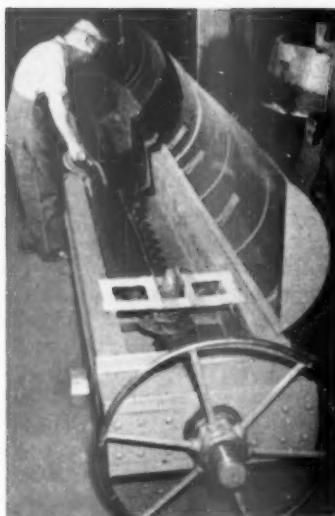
Chain testing equipment in which chains up to one inch are proof tested after chain has been welded, heat-treated and checked for hardness.
